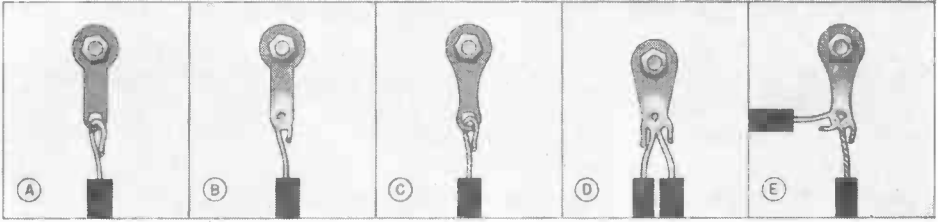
These illustrations show essential features of various soldering lug connections. Note how the solder joins the wire and the lug into a single unit. This is possible only when the work is heated sufficiently to melt the solder into a liquid. A—Permanent hook joint with solid wire, before soldering; B—Permanent hook joint with solid wire, after soldering; C—Permanent hook joint with stranded wire, before soldering; D—Two temporary hook joints to a lug with solid wire, after soldering; E—Two permanent hook joints to a lug, after soldering.
